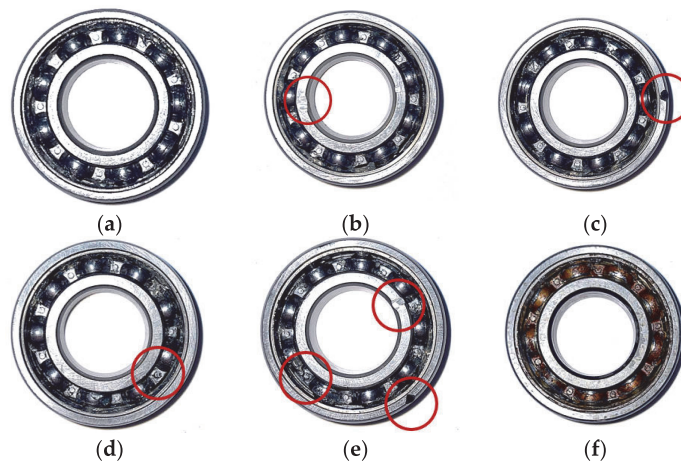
Studied bearings with different damages: (a) healthy bearing, (b) bearing with damaged inner ring, (c) damaged outer ring, (d) damaged cage, (e) complex damage, and (f) material fatigue.
